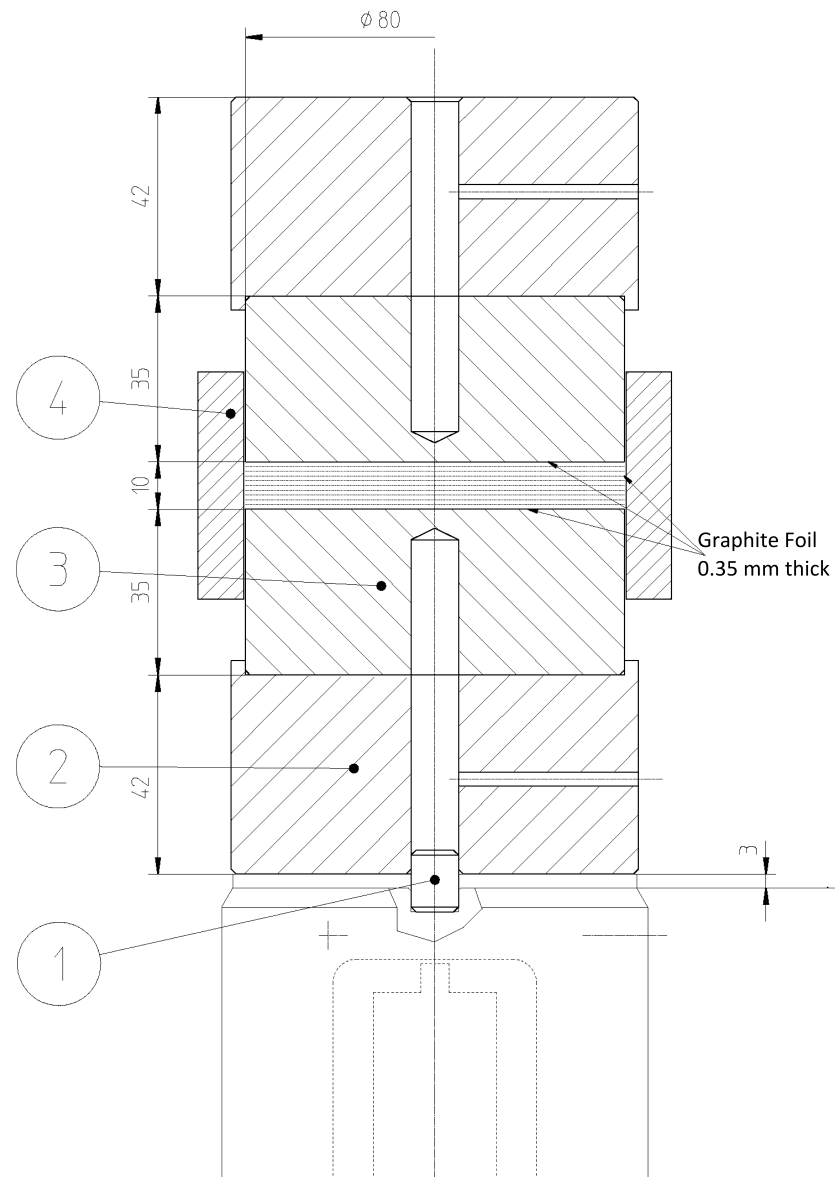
Technical drawing showing the dimensions of the components of the 80 mm diameter all-graphite FAST mould assembly.
